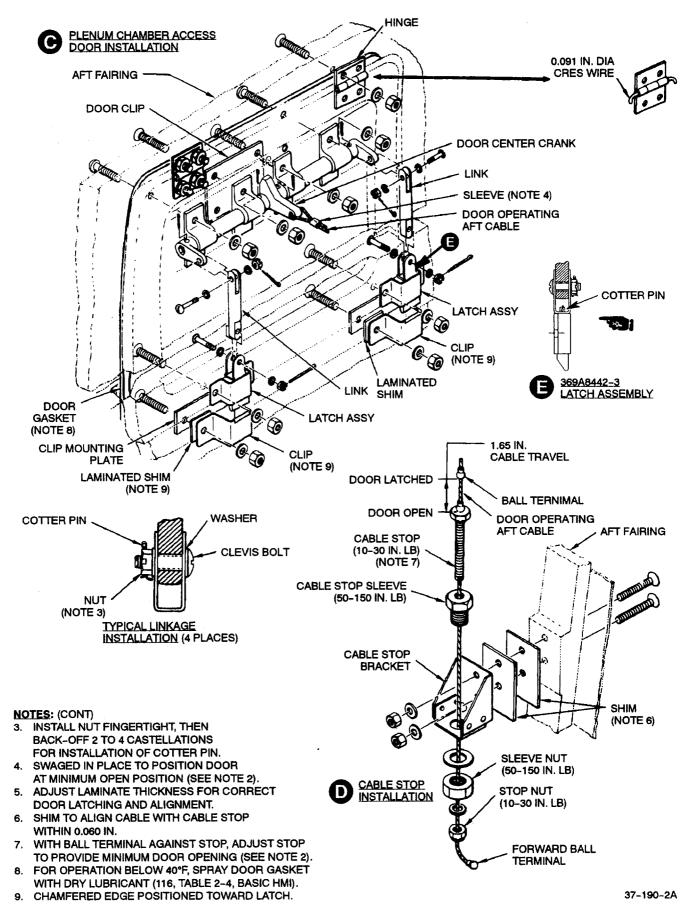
Particle Separator Filter Door Opening Equipment (Sheet 2 of 2)
